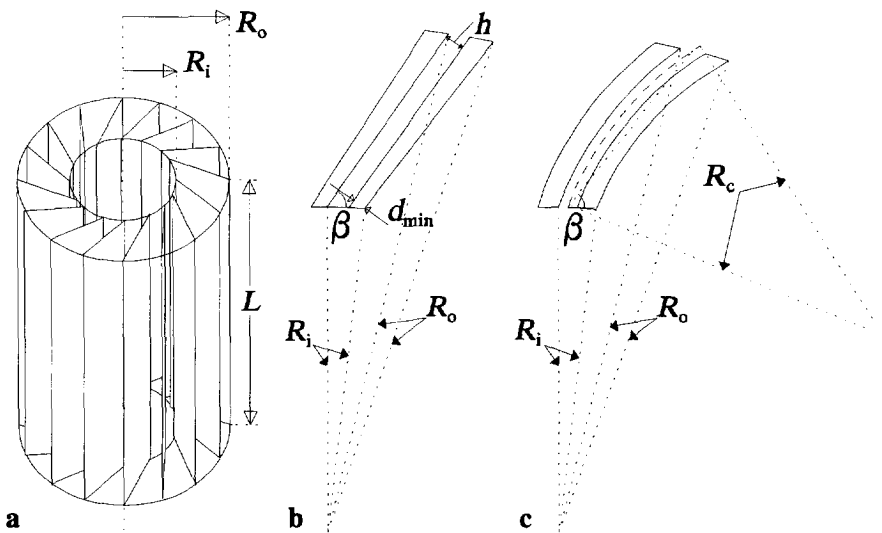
Dimensions of the parallel channel centrifuge (PCC).
